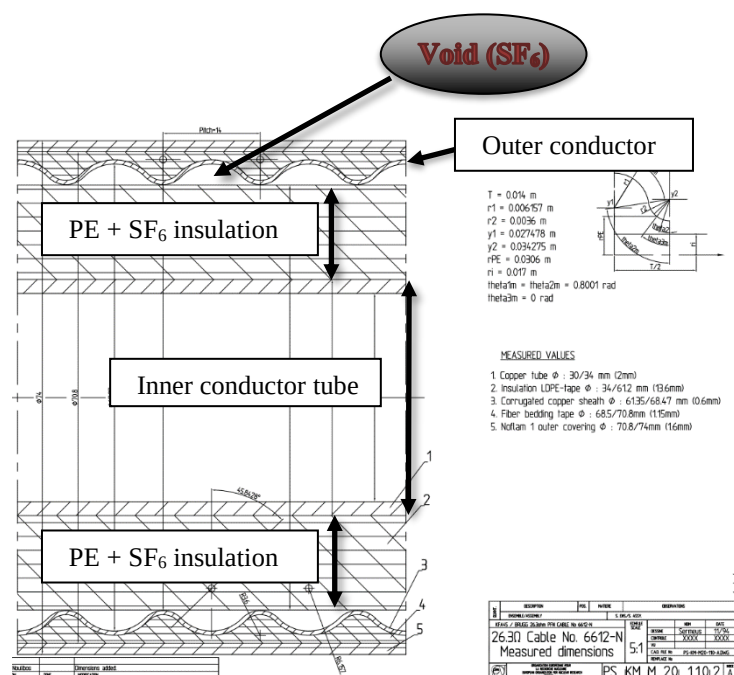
Design printout of the 26.3 Ω Brugg SF_6 cable
